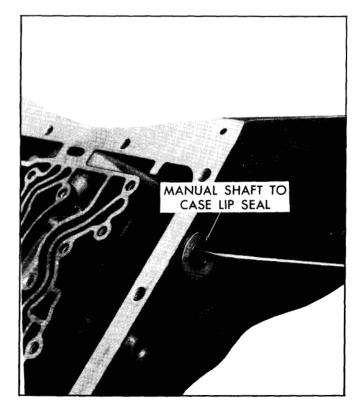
Removing Manual Shaft to Case Lip Seal
